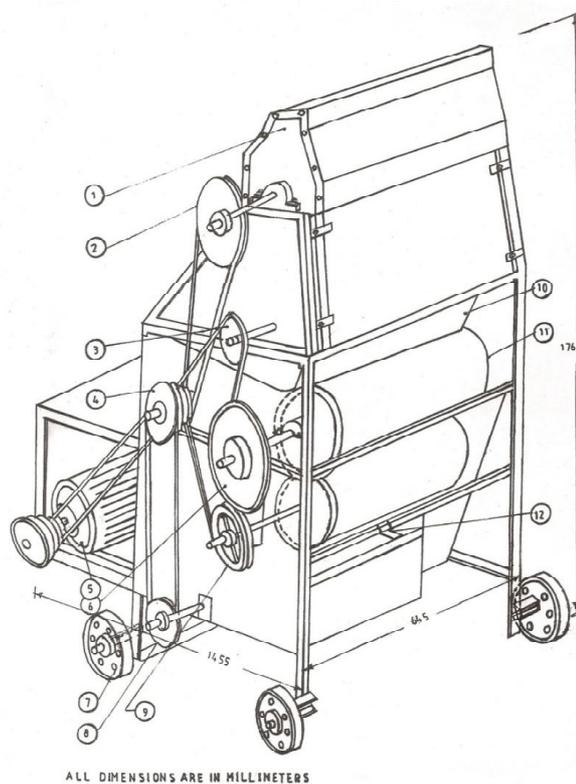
Isometric view of modified green chickpea pod stripping cum shelling machine
